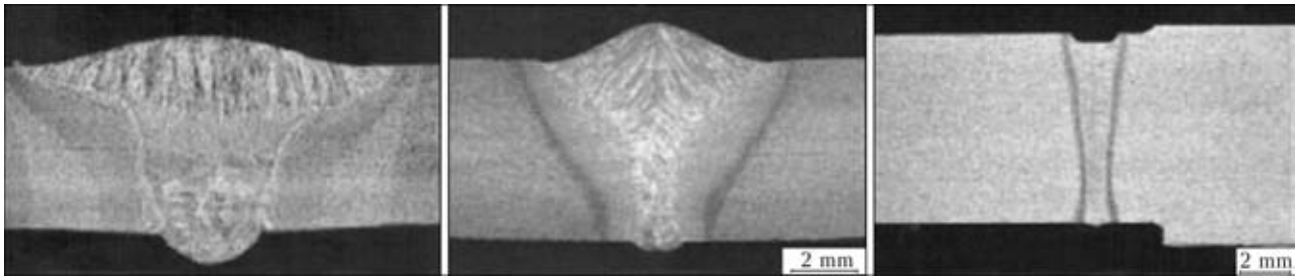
Macrosection of pipe steel joints produced using different power sources: *a* – MIG/MAG; *b* – MIG/MAG + laser; *c* – laser
